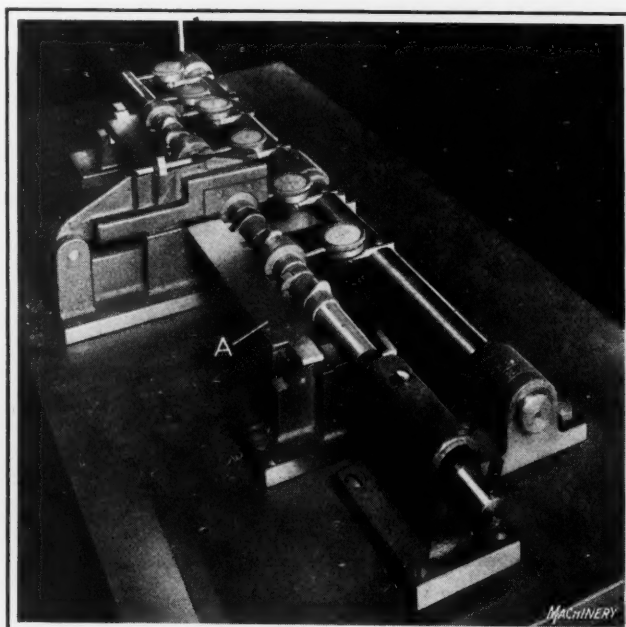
Testing Spacing of Cams and Bearings, and Concentricity of Bearings
